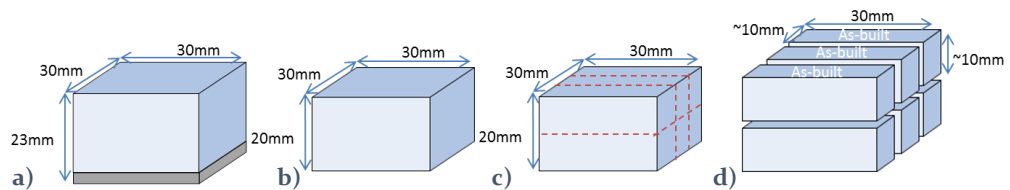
a) starting sample dimensions, b) without support structures, c) cutting lines, d) final sample sizes.
